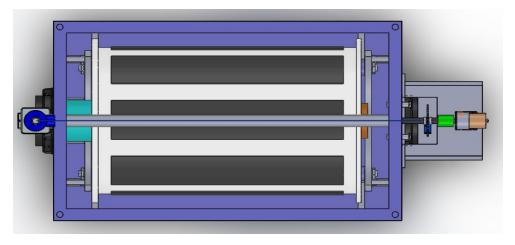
Top View showing Drum, Motor, Optical Tach and Sprinkler System
